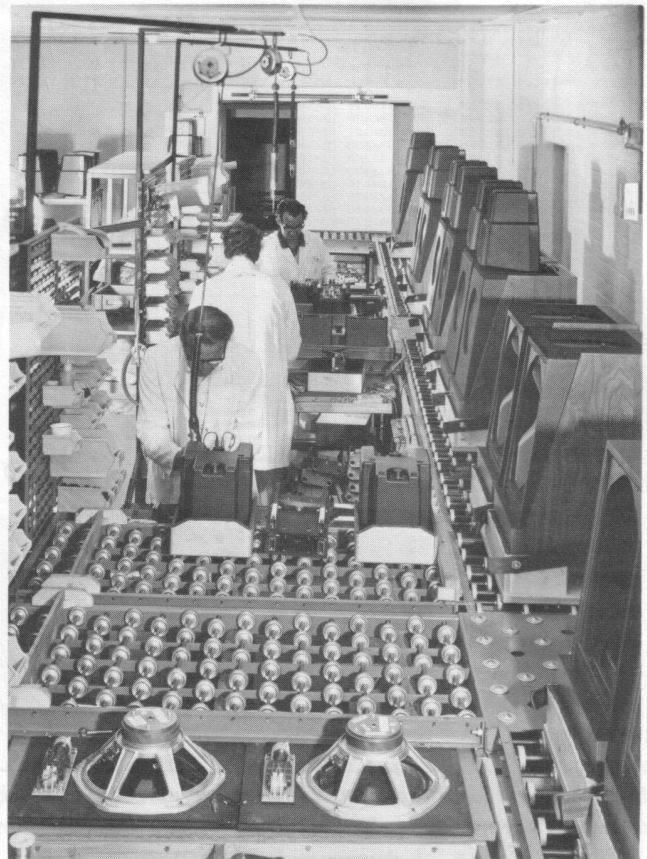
General view of assembly area for Model 105 loudspeakers.
